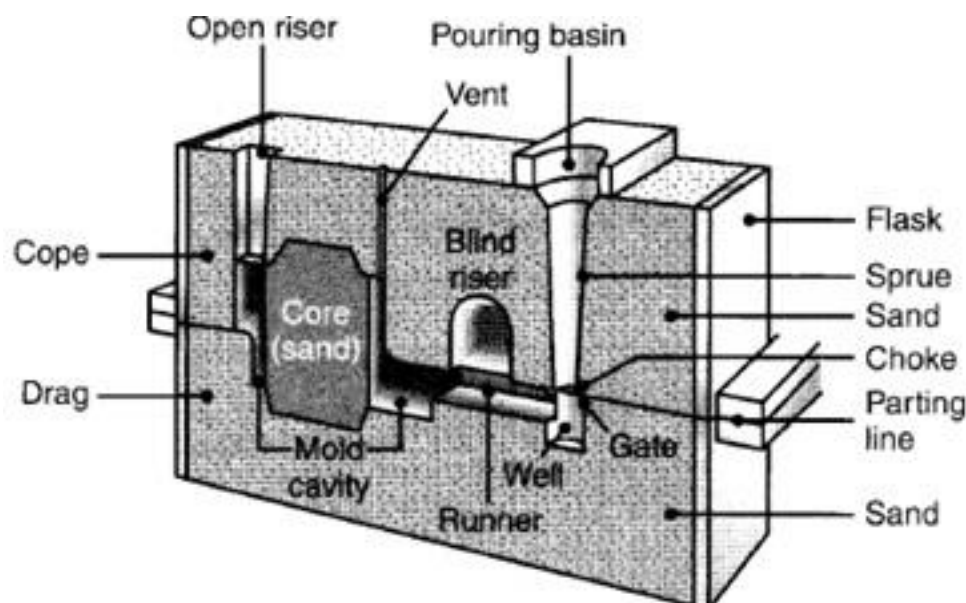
Typical schematic illustration of a sand mould, showing the major features in sand casting (adapted from Kalpakjian & Schmid, 2014:261)
